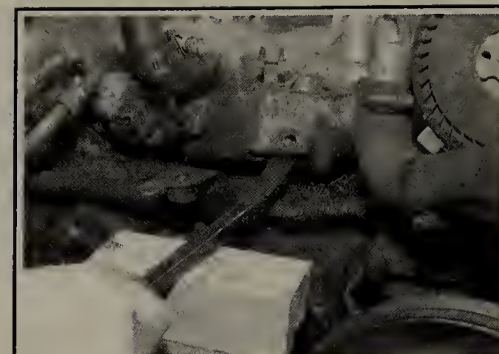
If the manifold sticks to the block, carefully use a block of wood and a pry-tool to carefully pry up on the mounting boss on the end of the manifold
